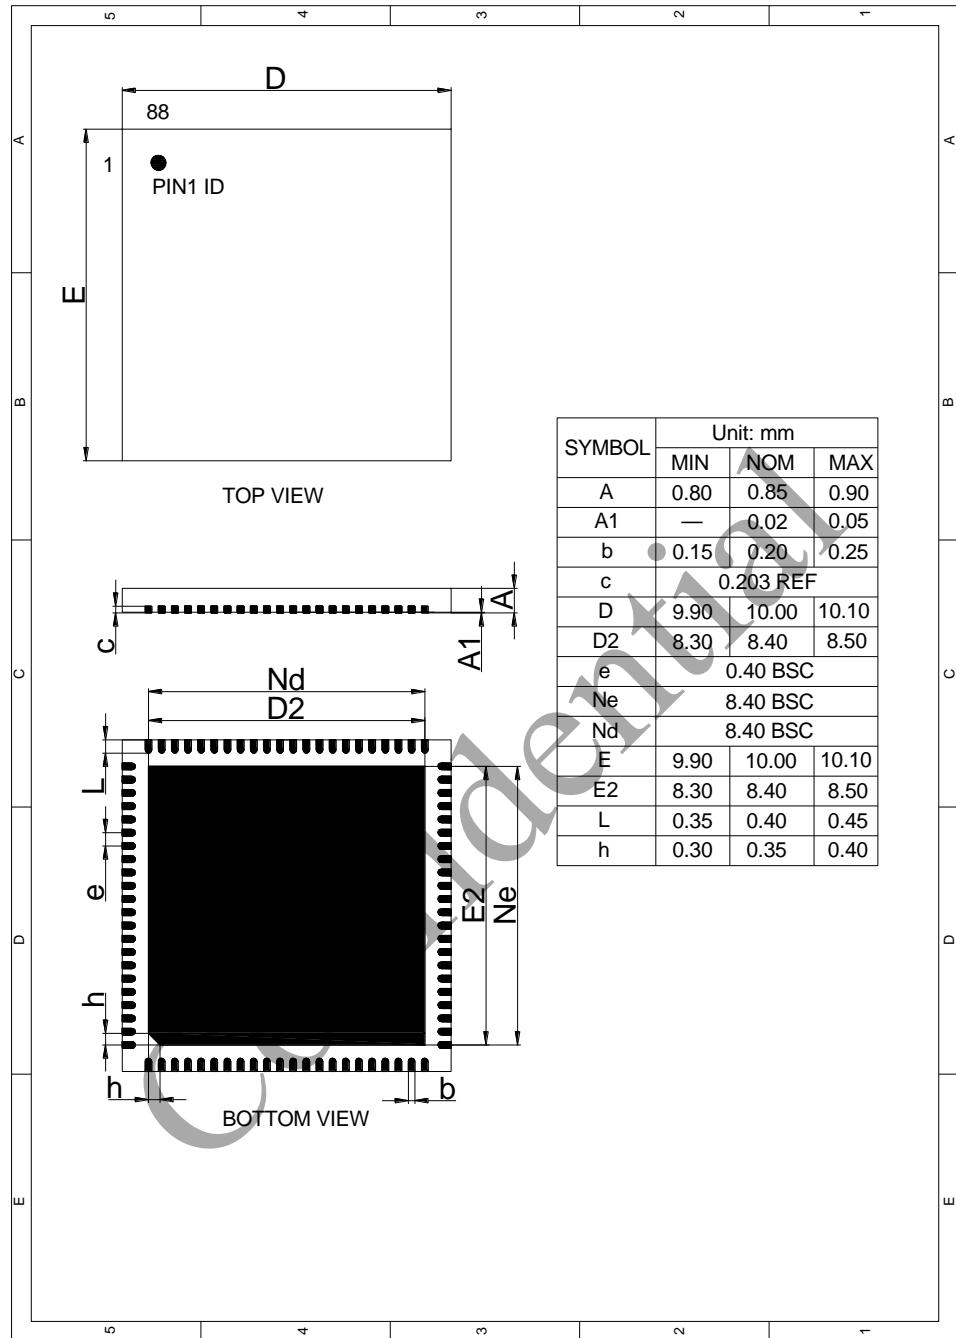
Mechanical Outline of SCT3288 QFN88 Package
